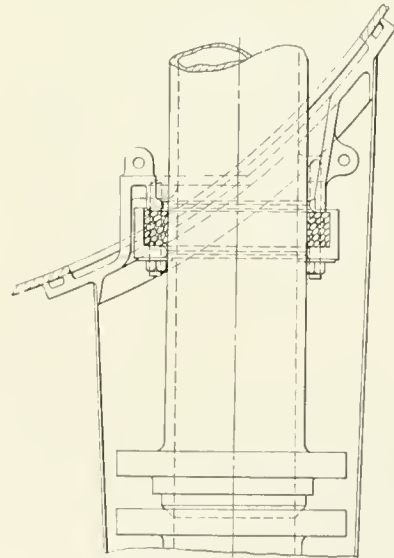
Improved Type of Joint for Outside Steam Pipe
